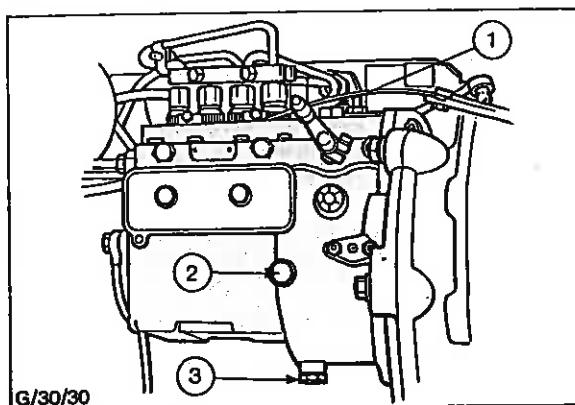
Injection Pump Oil Plugs (Class 'A' and Combine Harvester Governing Only)
